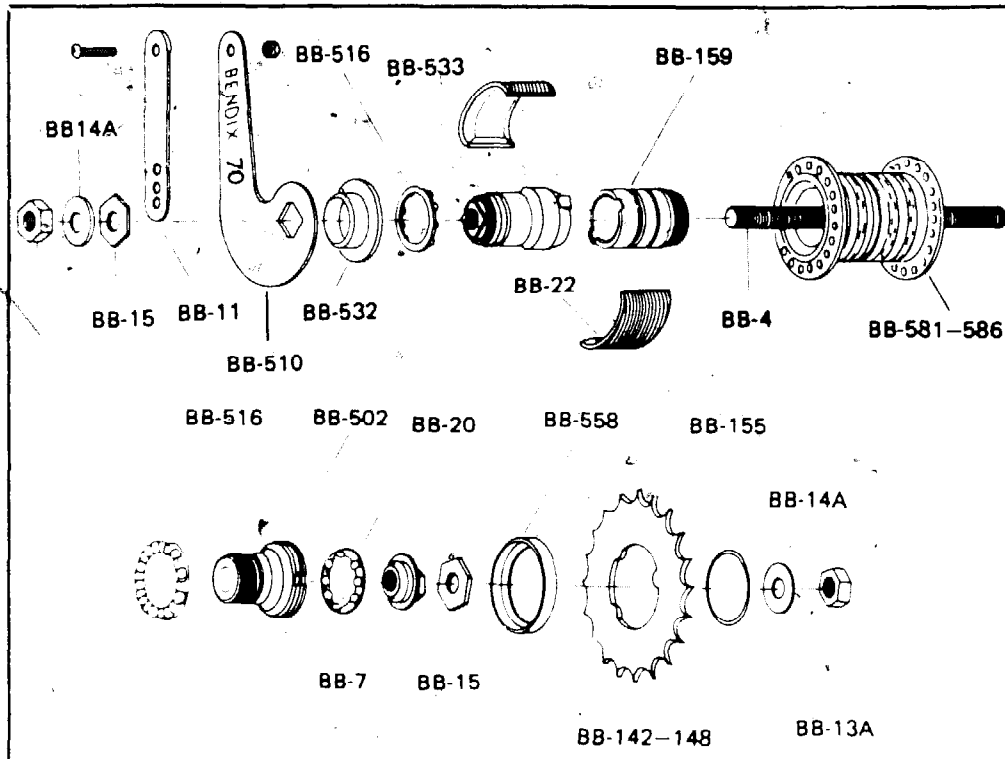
Bendix Model 70 coaster brake. Parts are: (BB-4) axle, (BB-7) adjusting cone, (BB-11) arm clip assembly, (BB-13A) axle nut, (BB-14A) axle washer, (BB-15) lock nut, (BB-20) retainer, (BB-22) sub assembly, (BB-502) drive screw, (BB-510) brake arm, (BB-516) retainer, (BB-532) dust cap, (BB-533) expander, (BB-558) dust cap and (BB-581-586) hub shell.
